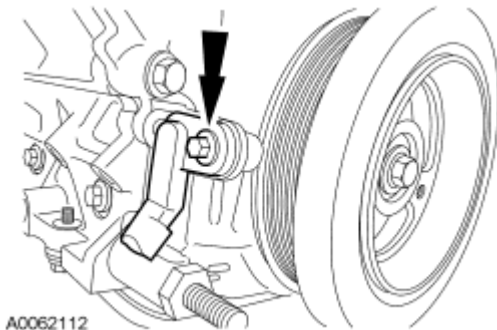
Locating Crankshaft Position (CKP) Sensor Bolt
